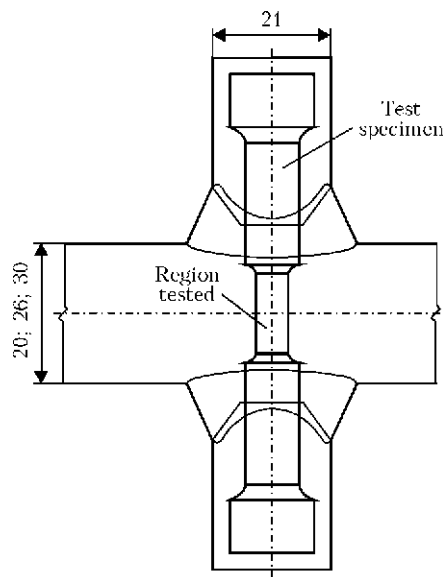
Scheme of cutting out of specimens from the welded joints made in accordance with GOST 28870–90
